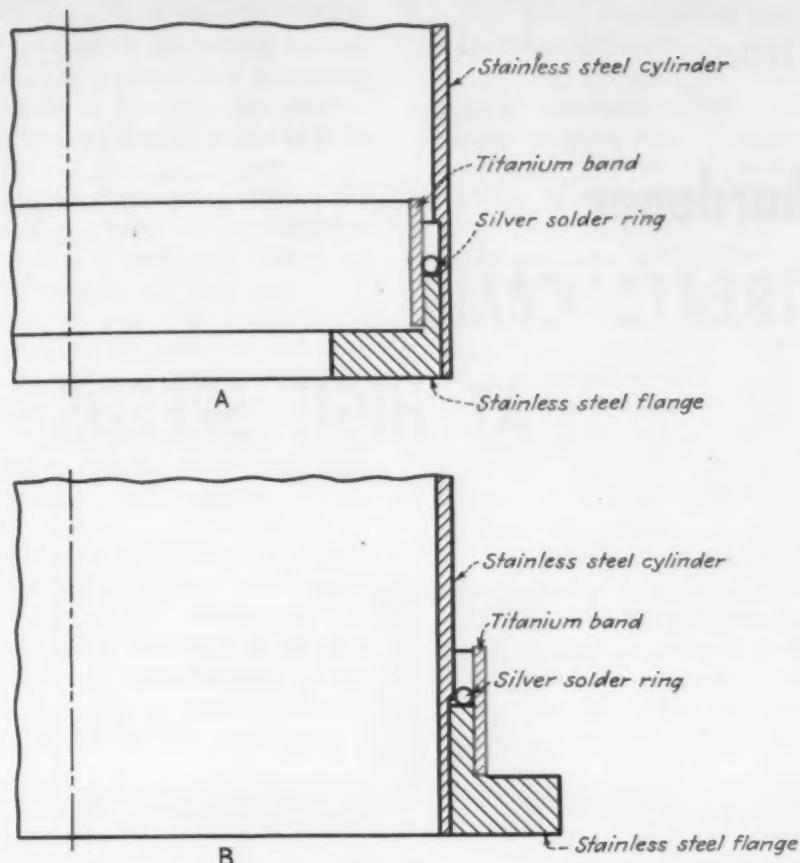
Titanium dam ring proved answer to difficult silver brazing job. Rings hold solder in place while assembly is brazed in fused salt bath, are easily removed after brazing. Silver solder does not bond to titanium.
